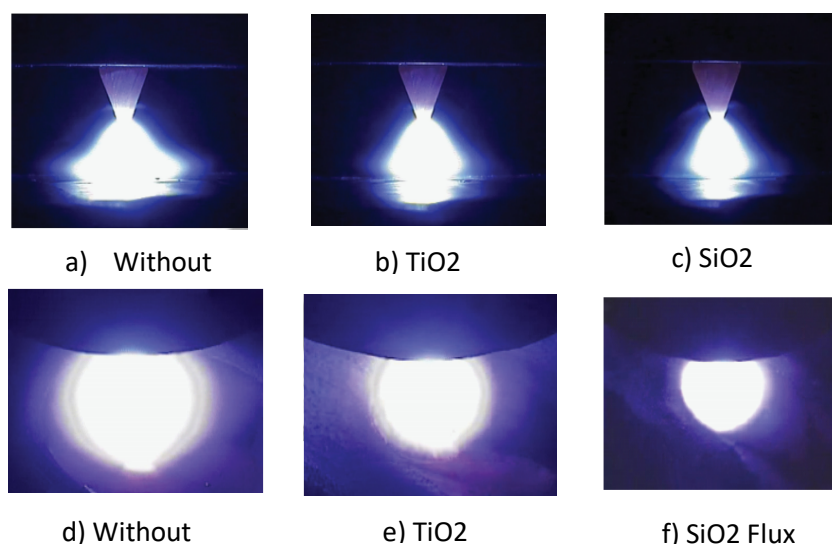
a-c: Plasma column in TIG welding with/without fluxes and d-f: Anode root in TIG welding (Tseng et al.)
